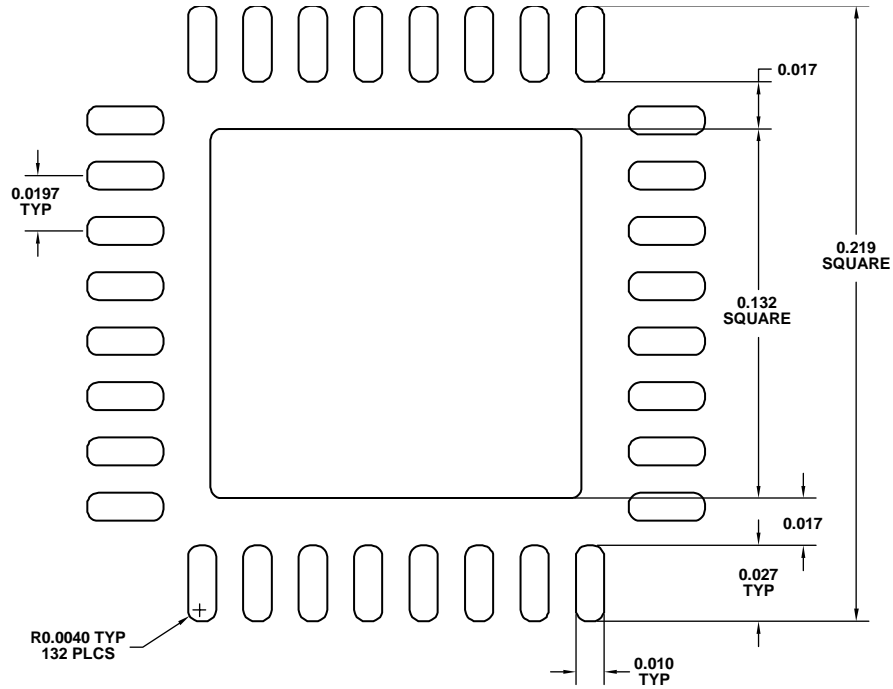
Solder Paste Stencil of the ADMV1010-EVALZ
